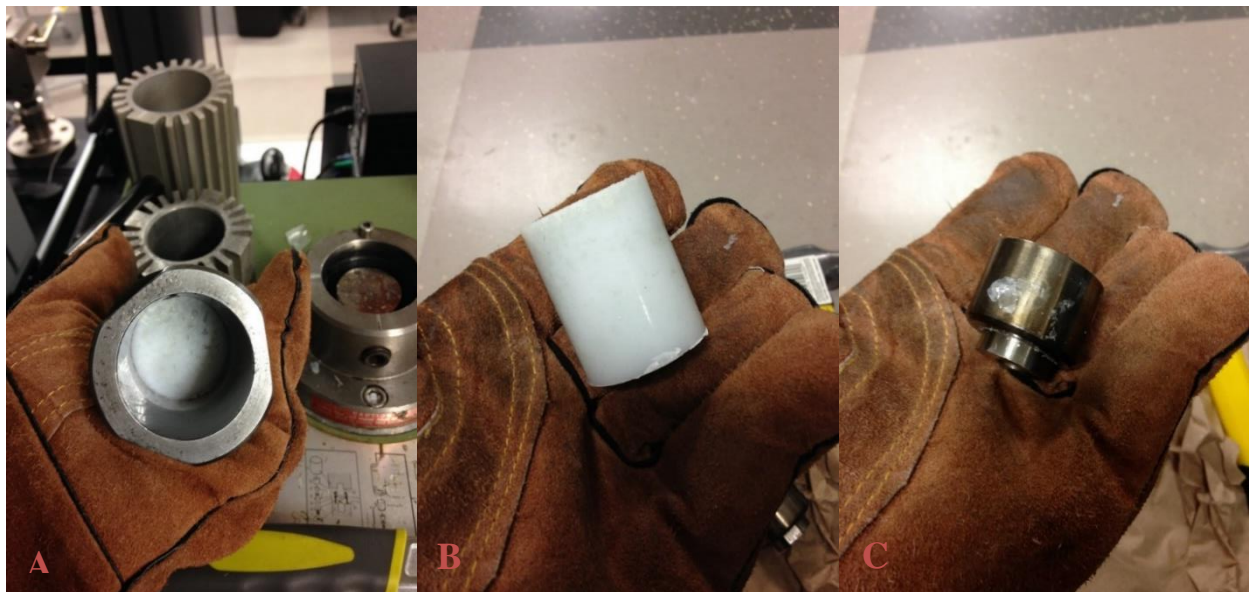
Mock PBX sample within the metallic mold (A). The mock PBX sample after removal from the mold (B), and the locking die as well (C).
